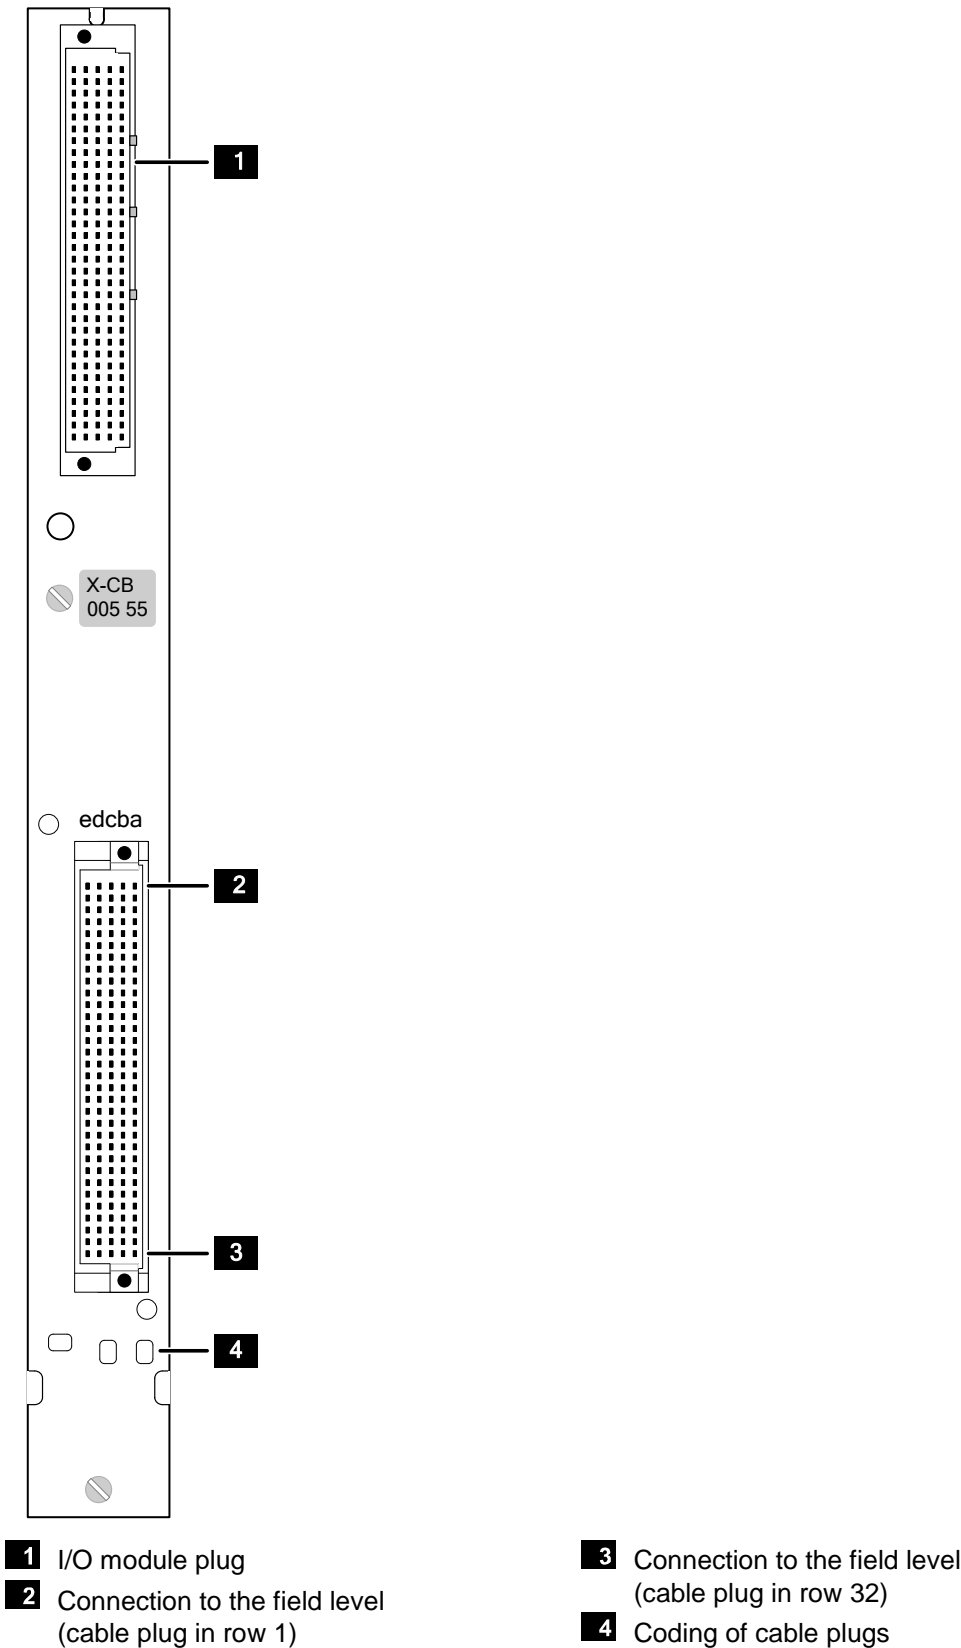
X-CB 005 55 Mono Connector Board with Cable Plug
